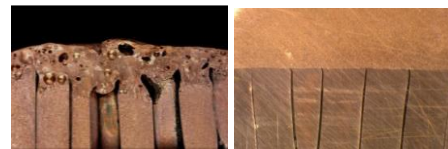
Enameled coated Cu-wires being either laser-welded (left), or coated by CS (right)
